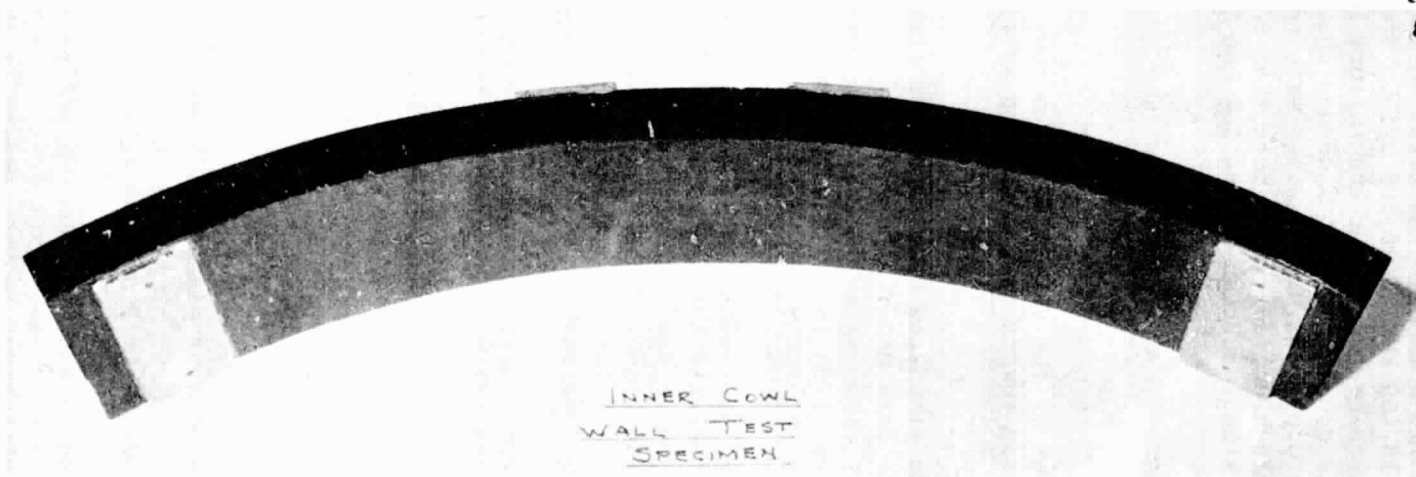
Failed Specimen of Core Cowl Wall Subcomponent.
